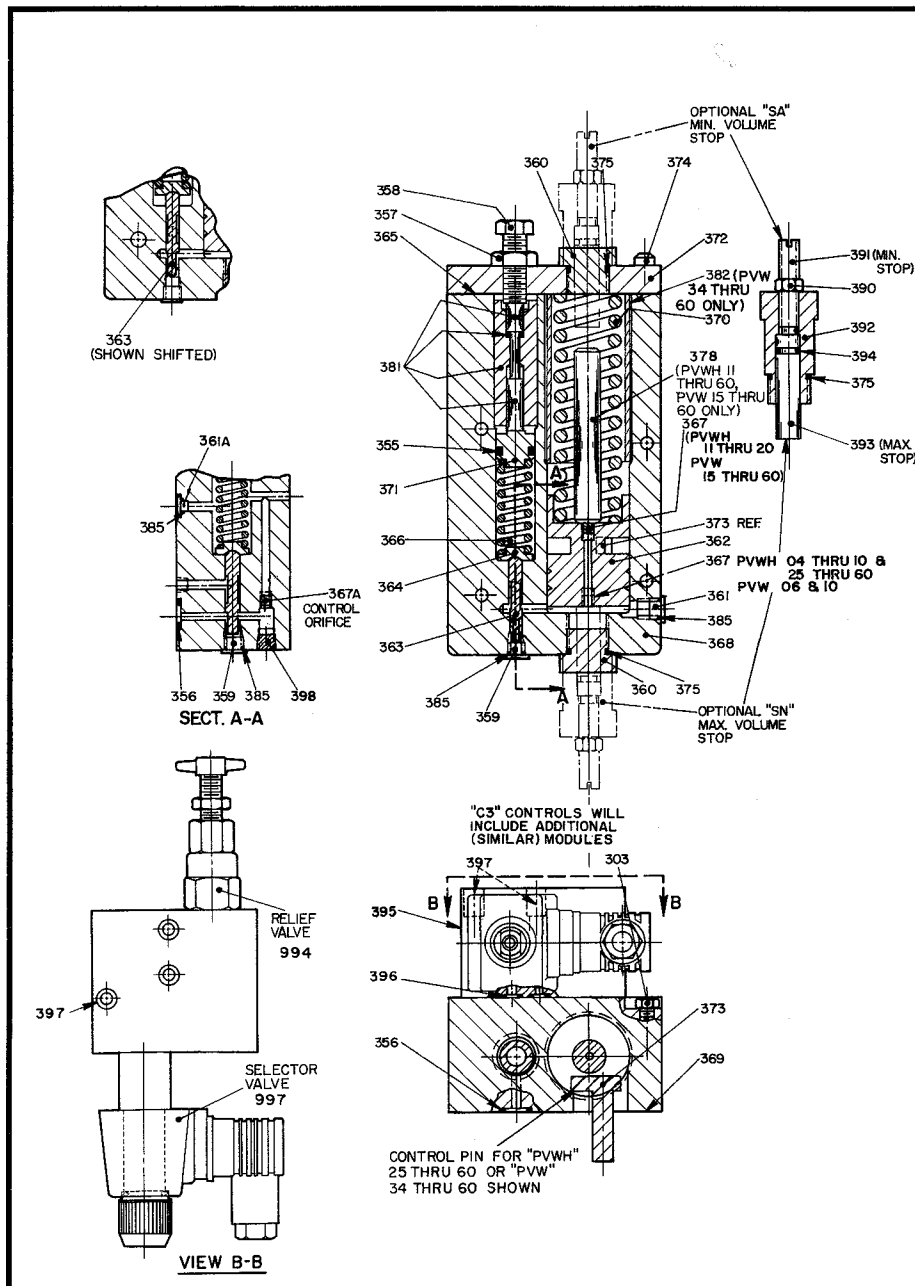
Parts Drawing, Oilgear Type "C2" Control (509819B).
